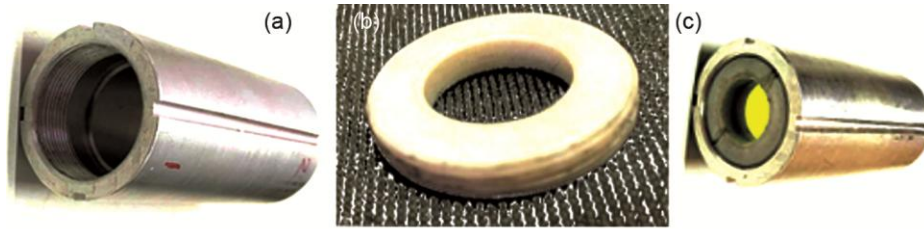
(a) Spline shaft (b) Lock nut (c) Holding of mirror in the shaft.
